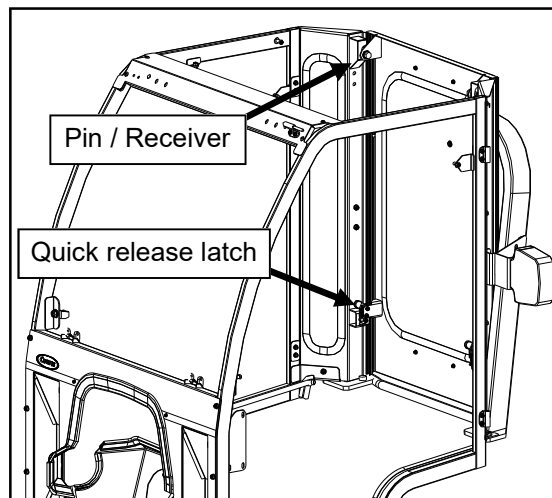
(Rear Leg / Rear Panel Engagement)
